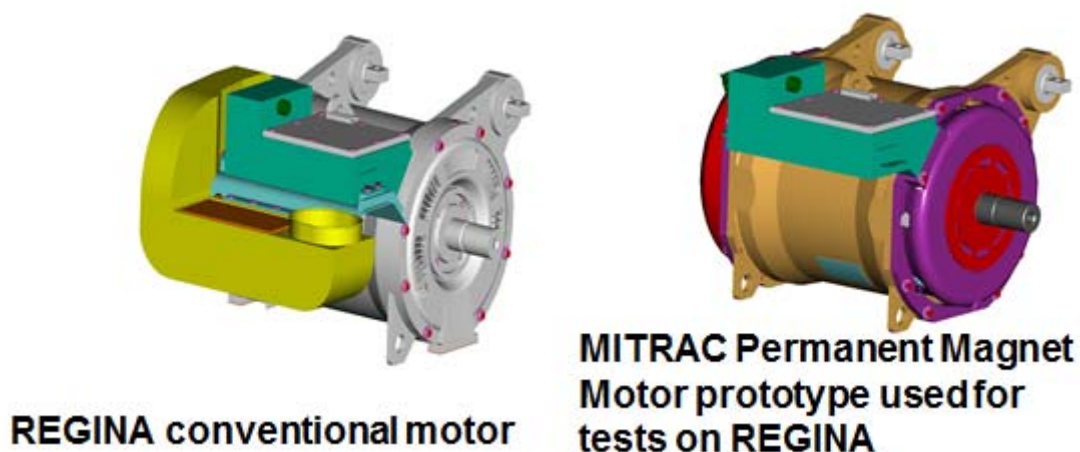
CAD drawings of IM and PM motors (source: Bombardier).
